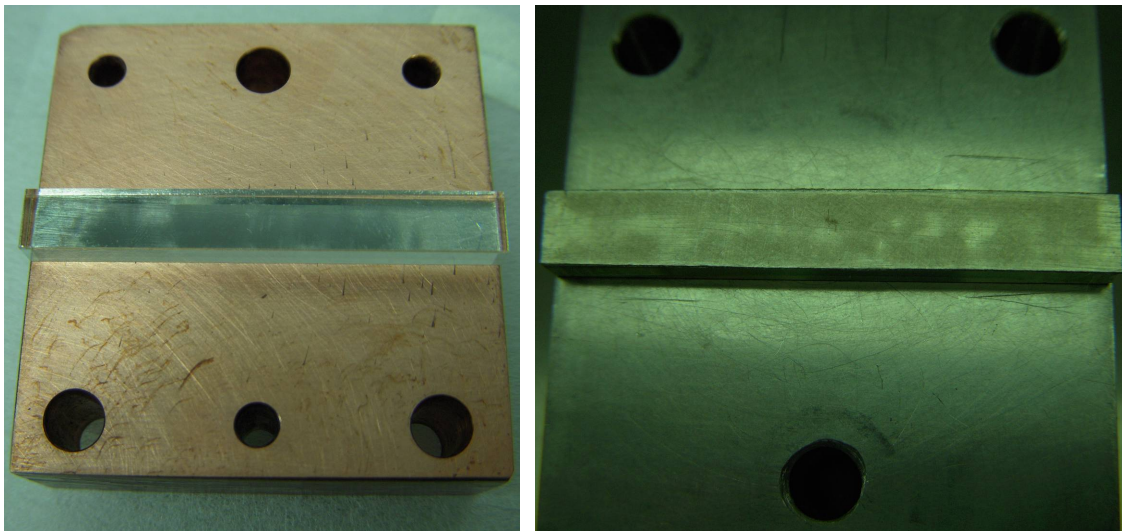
Photographs of the securing copper block after assembly before (left) and after (right) remachining of the surfaces, showing significant improvement in uniformity of the crush on the indium after machining.
